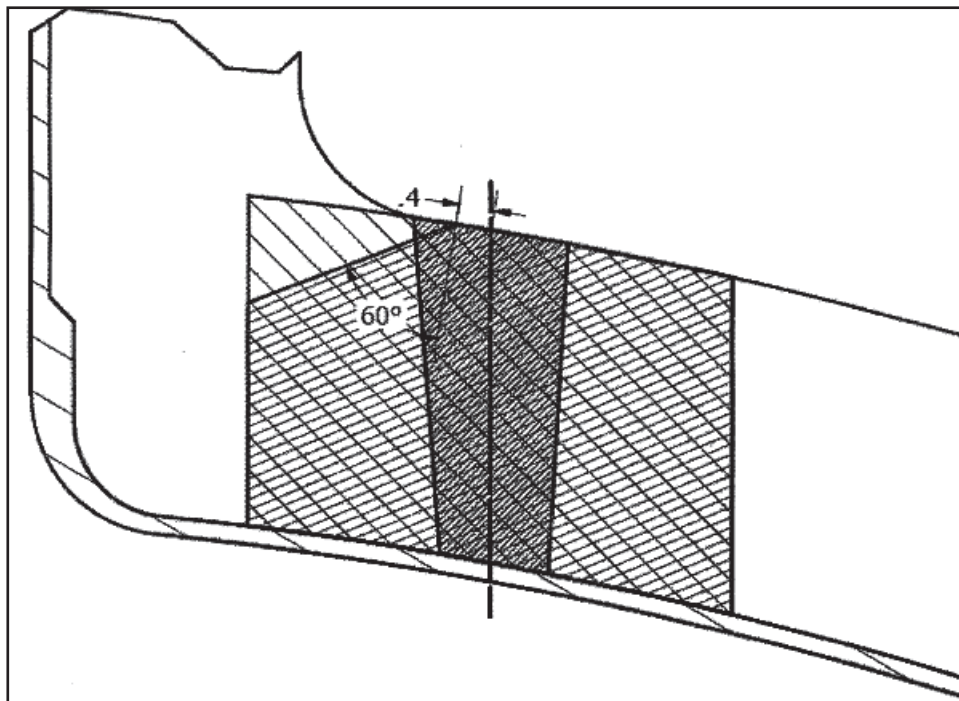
Weld WP-12, 60° Head Side Axial Scans
